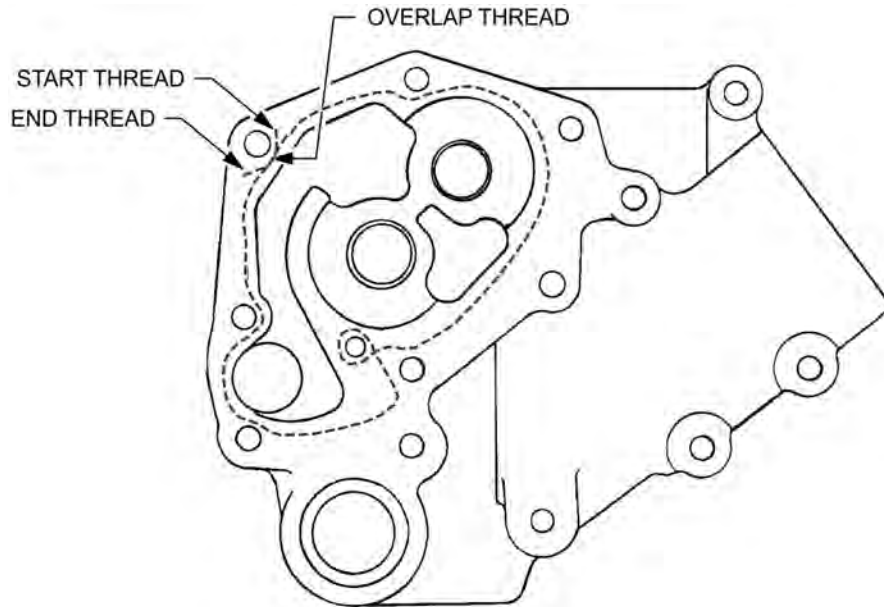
Threading Diagram, Oil Pump Assembly 631713, 632481, 632563, & 641993
